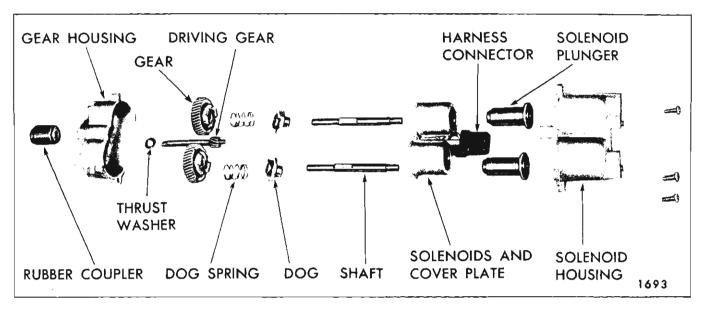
H9—Exploded View of Four-Way Seat Transmission
